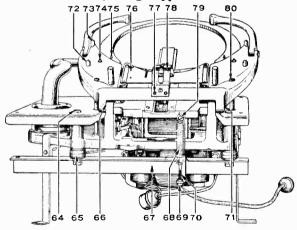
Automatic Mechanism Back View 12. NEEDLE LOWERS OUTSIDE 12" RECORD DIAMETER-Should the needle fail to lower on the smooth outside rim of a 12" record, but lowers outside the : ecord:
